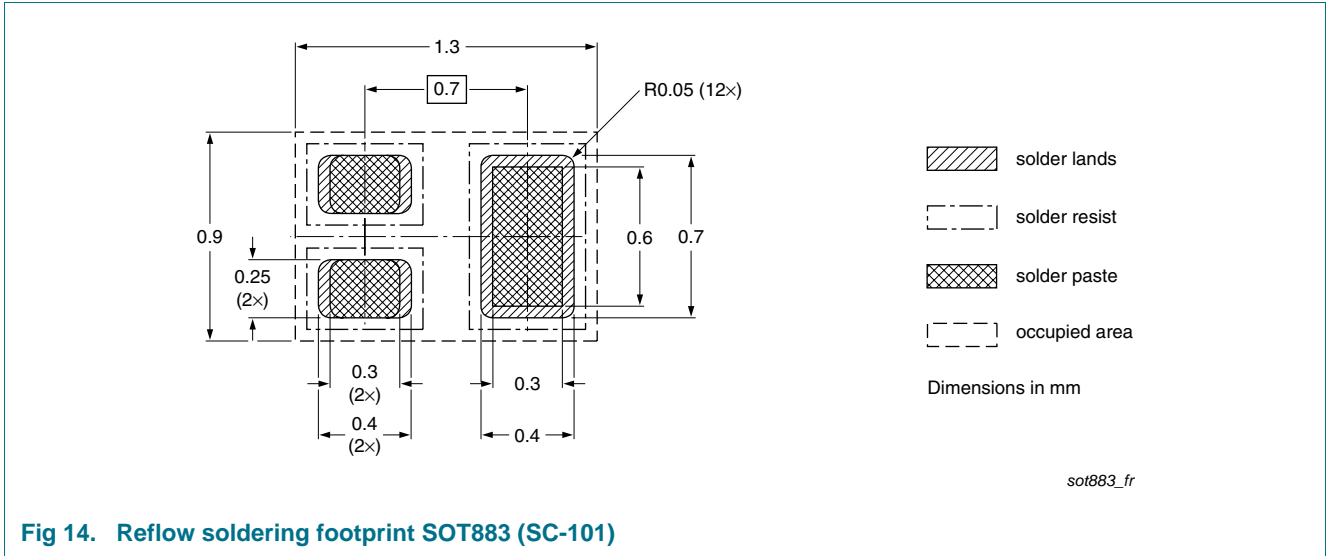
Reflow soldering footprint SOT883 (SC-101)
